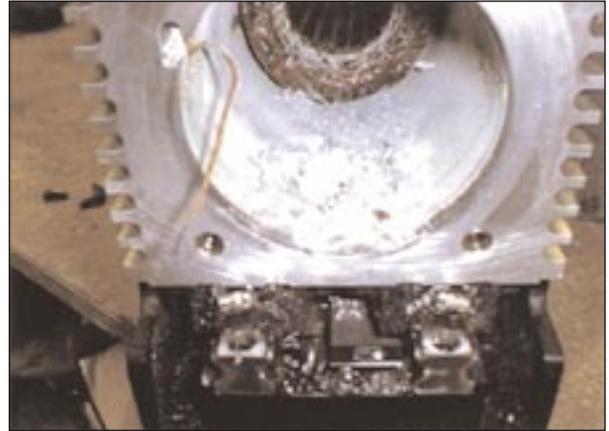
View of the spindle during disassembly showing the remnants of ceramic bearing. Talk about catching them in stage 4!
